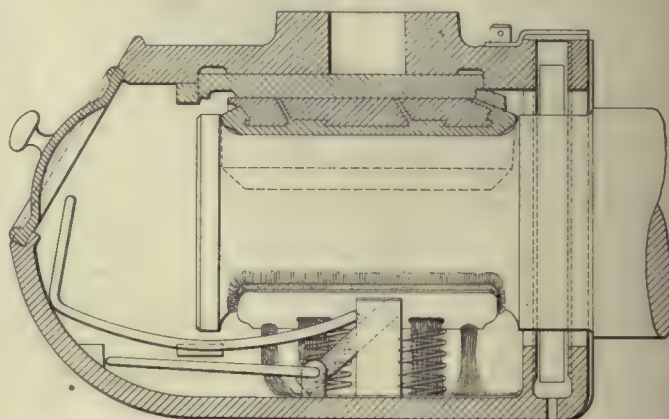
Old-Type Journal Bearing Construction Used Under German Passenger Cars
